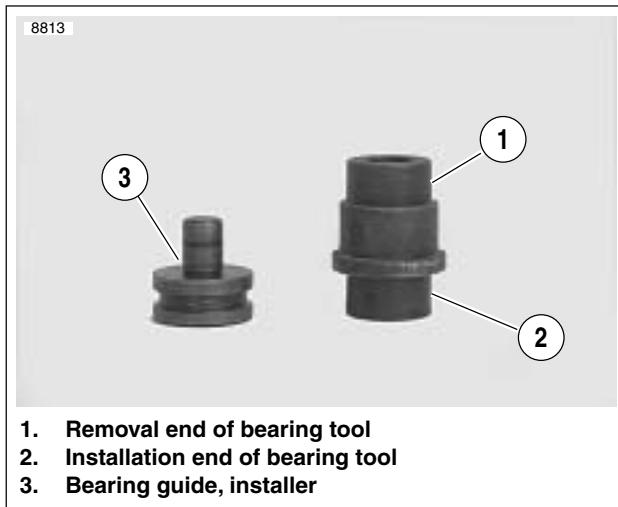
Clutch Shell Bearing Remover/Installer B-45926
